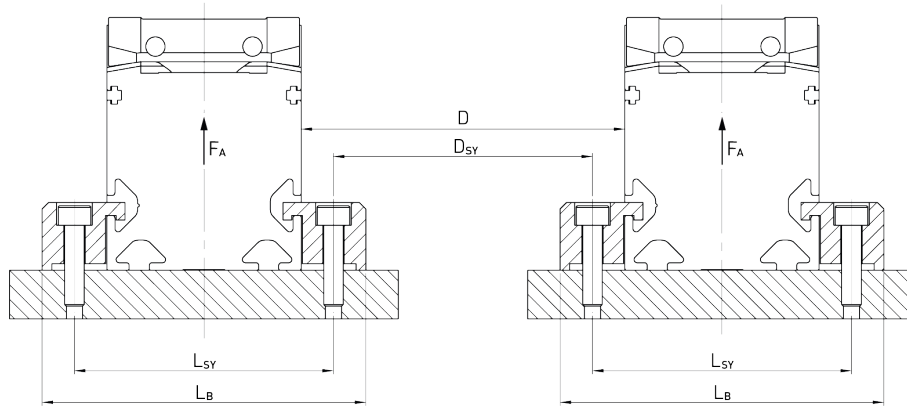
Mounting with clamping profiles – HM040B, HM060B, HM080B
